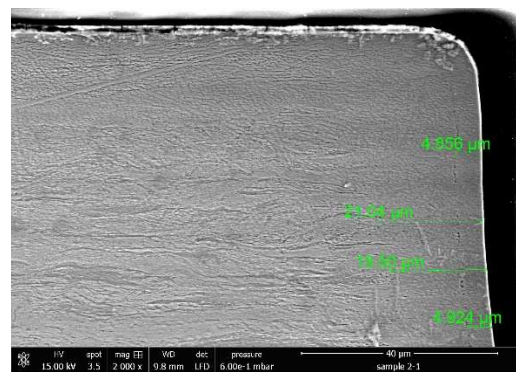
Test 2 sample 1 - 0.2 mm hole HAZ dimension
